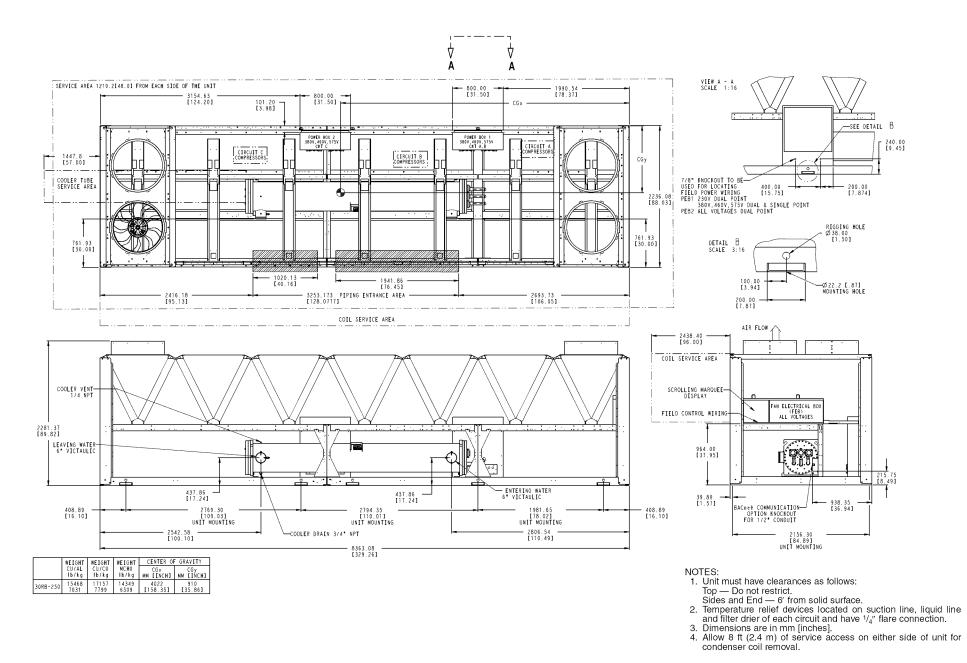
30RB250 Air-Cooled Chiller Dimensions
